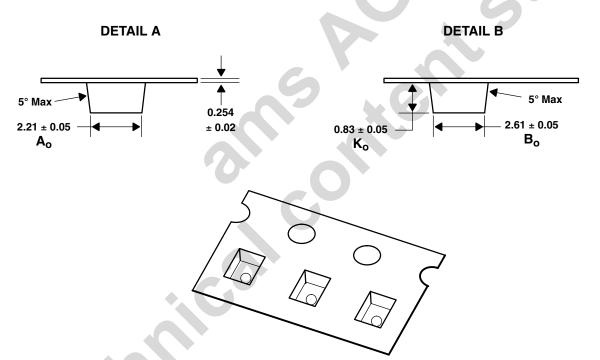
Package FN — Dual Flat No-Lead Packaging Configuration
